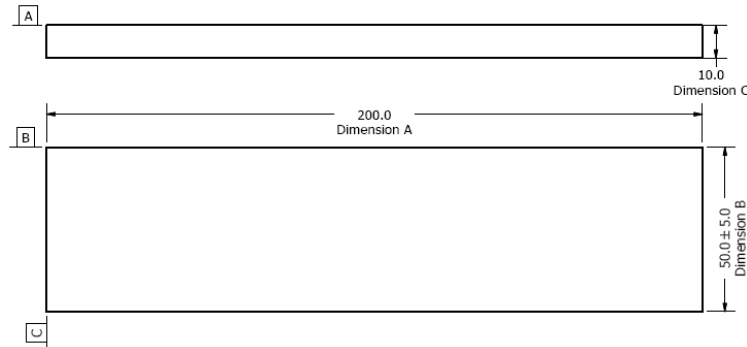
Engineering drawing of Block 1 with the datums boxed.
